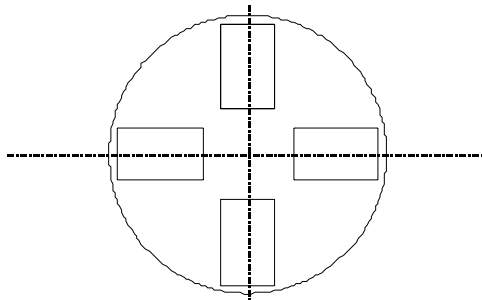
Orientation of test pieces machined from bar stock for tests at elevated temperatures
